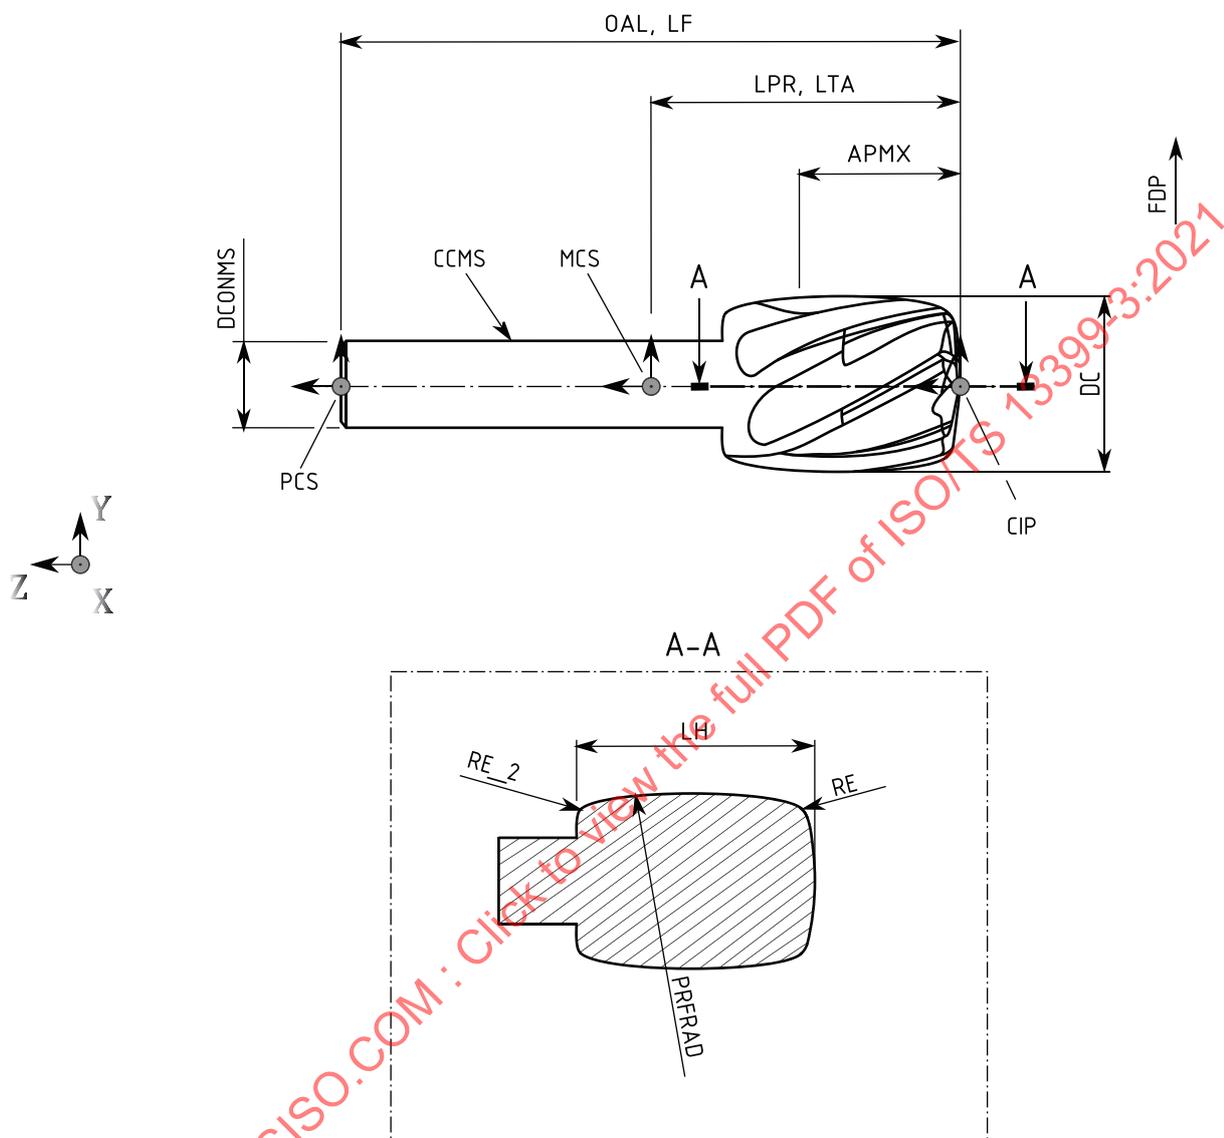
ISYC 303-11 - Thread end mill with drilling part, solid
